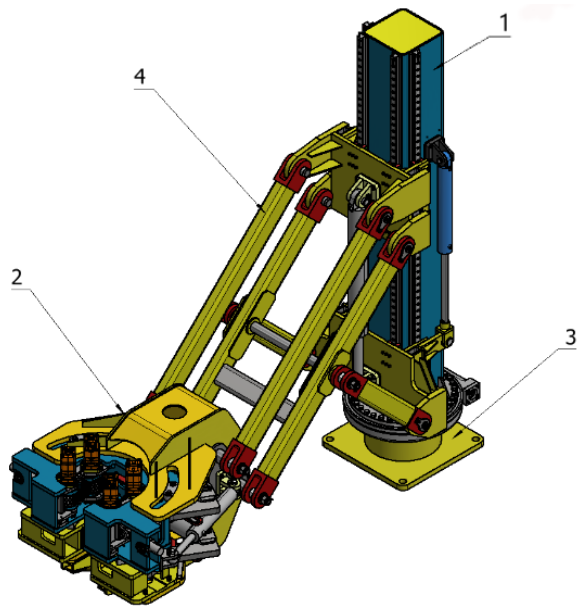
structure of iron driller. column; 2. clamp body; 3. base; 4. extension mechanism.
